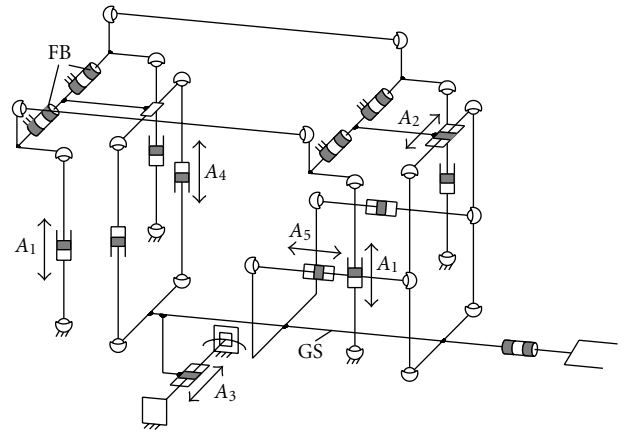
Geometric configuration of the serial-parallel forging manipulator.
